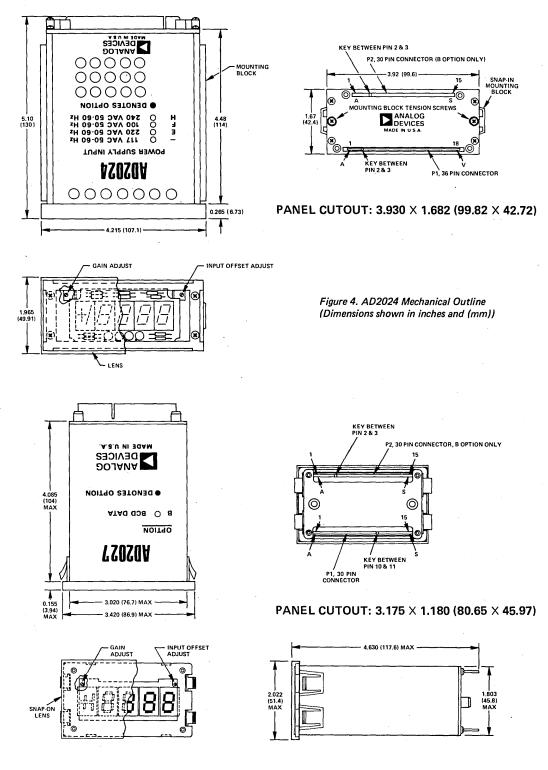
AD2027 Mechanical Outline (Dimensions shown in inches and (mm))
